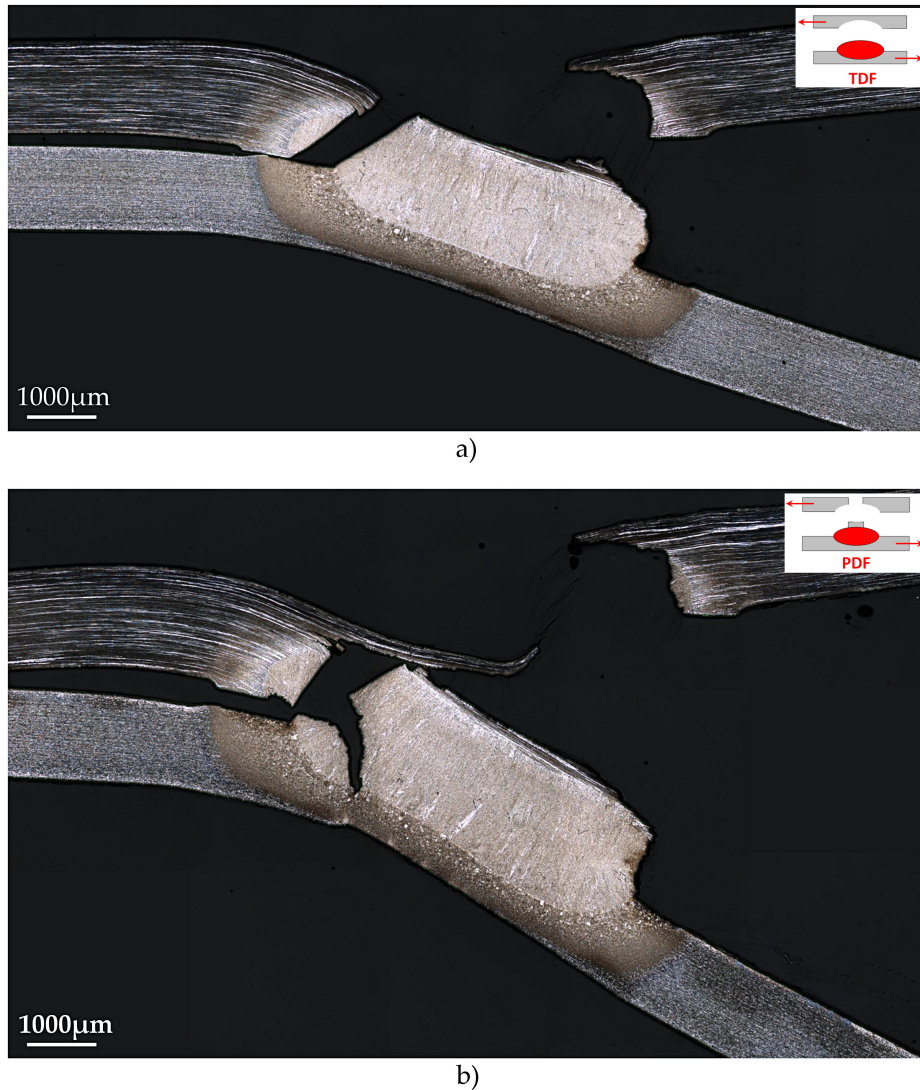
Spot weld Tensile Shear failure modes of Duplex 4Al/DP600 spot welds for middle and upper end welding intensities.
